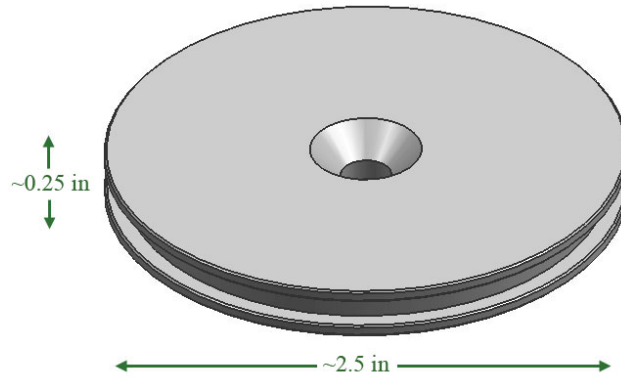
The Chamber Floor has a countersunk thru hole for a stainless steel flat head bolt as well as a groove for a sealing O-ring
